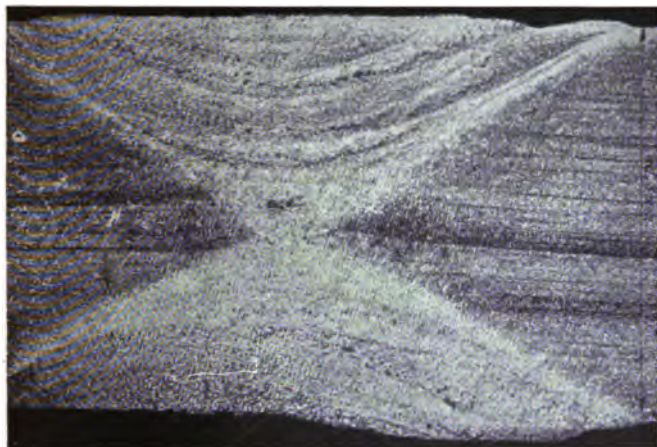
Double weld in a very thick mild steel sheet.
